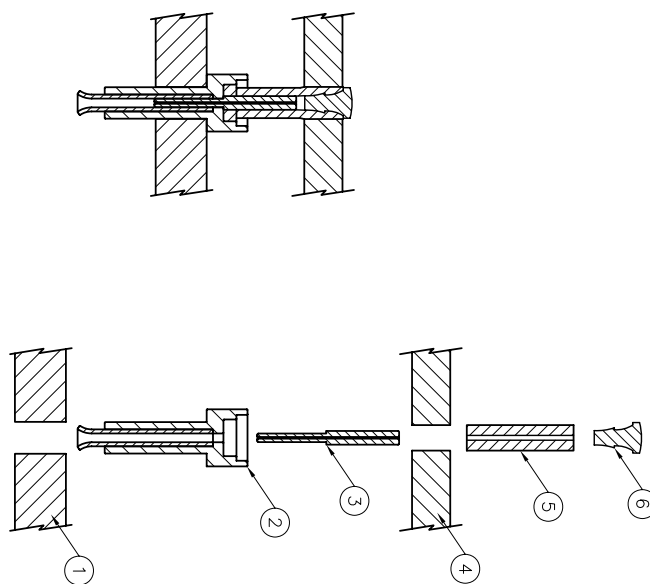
An assembly drawing showing how the crimp pin is inserted into the feedthrough and how the conductive elastomer tube fits over the crimp pin and inside the plated-through hole on the printed circuit board to make the electrical connection.
